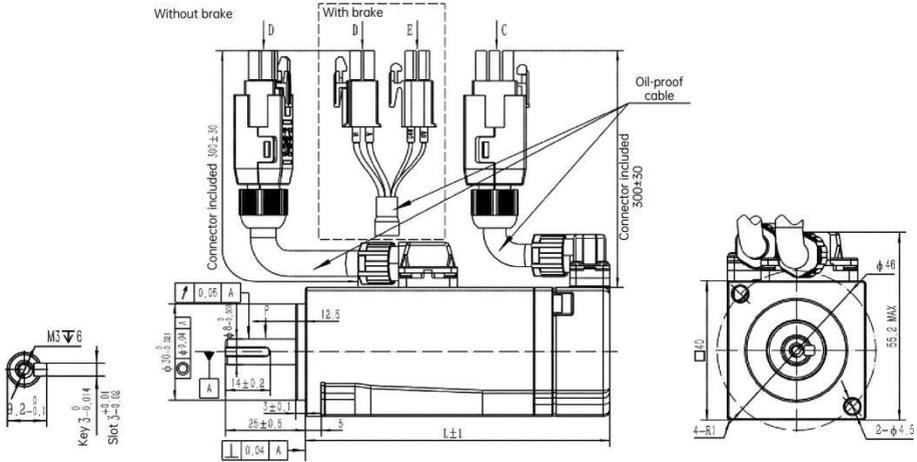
Outline and dimensions of frame No. 40 medium-inertia servo motor
